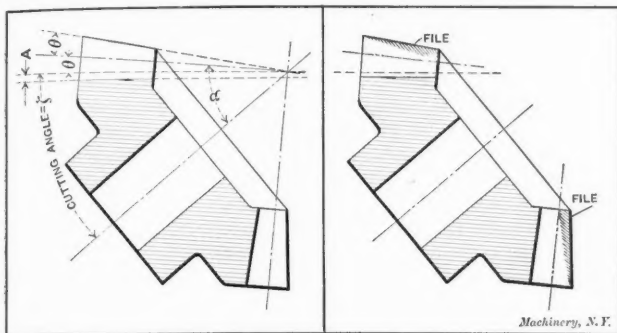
Parallel Clearance, best adapted to shaping with Formed Cutter
